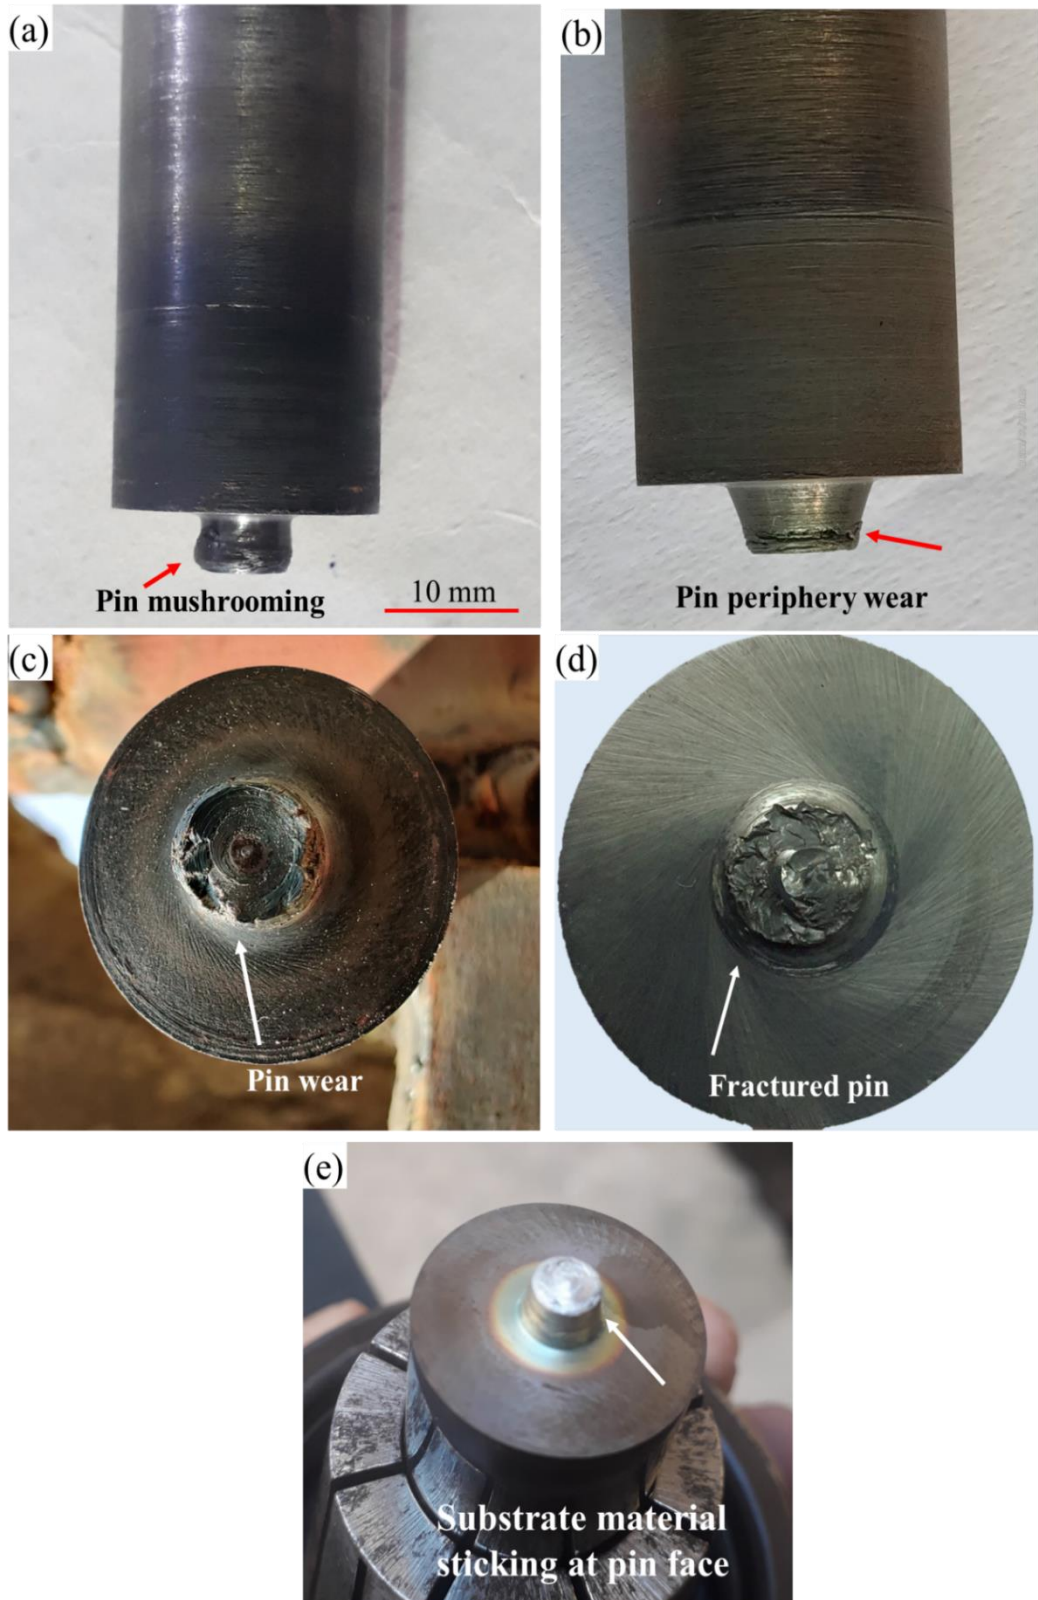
Tool defects during cladding copper on steel (a) pin mushrooming (b) pin periphery wear (c) pin face wear (d) tool B after pin breakage (e) aluminium substrate sticking on pin face for copper clad aluminium
